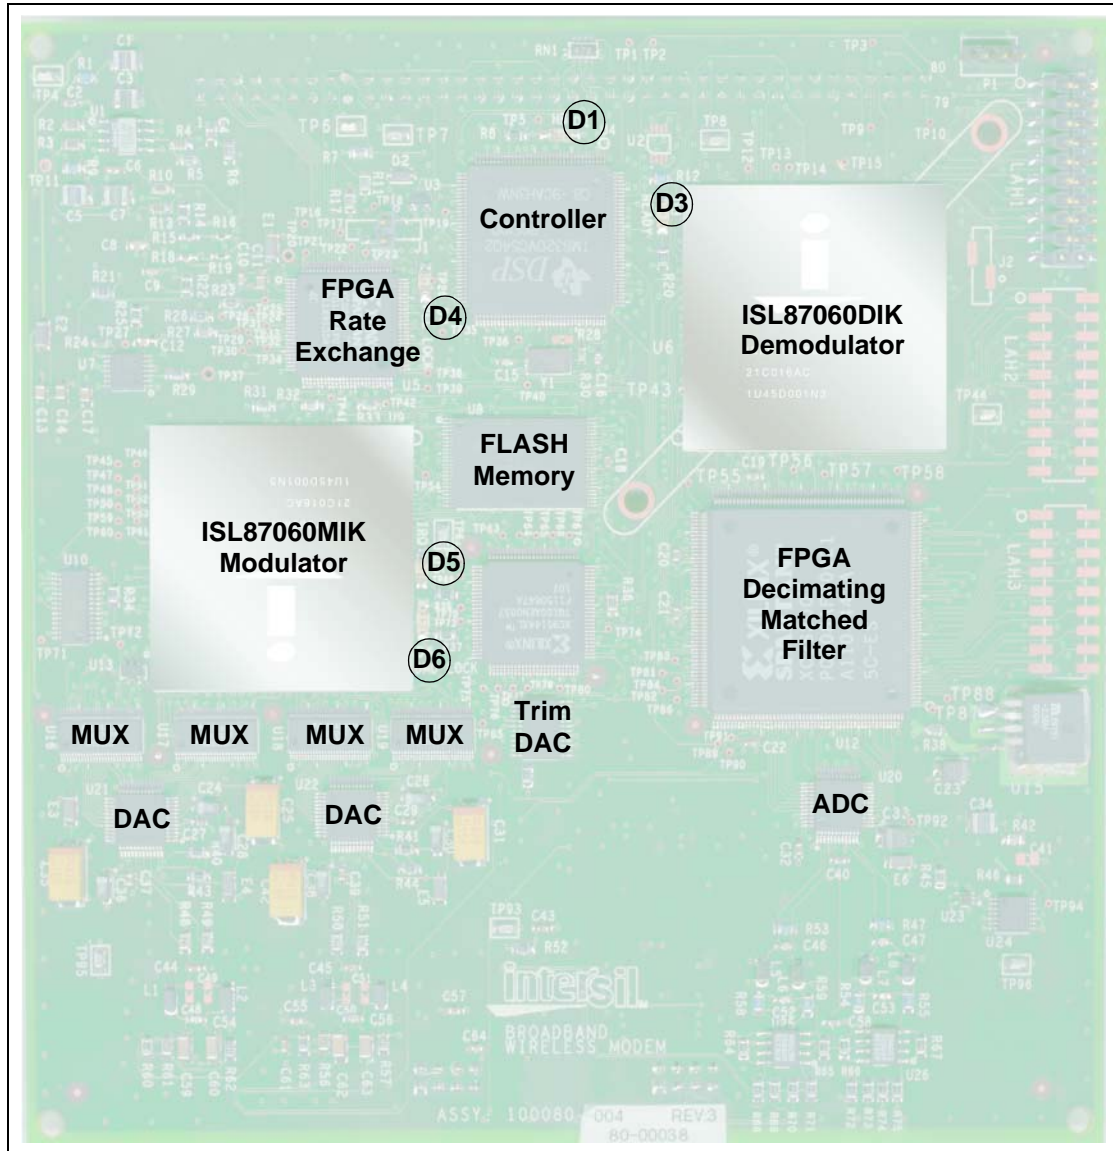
Modem Printed Circuit Board Assembly (PCBA)
